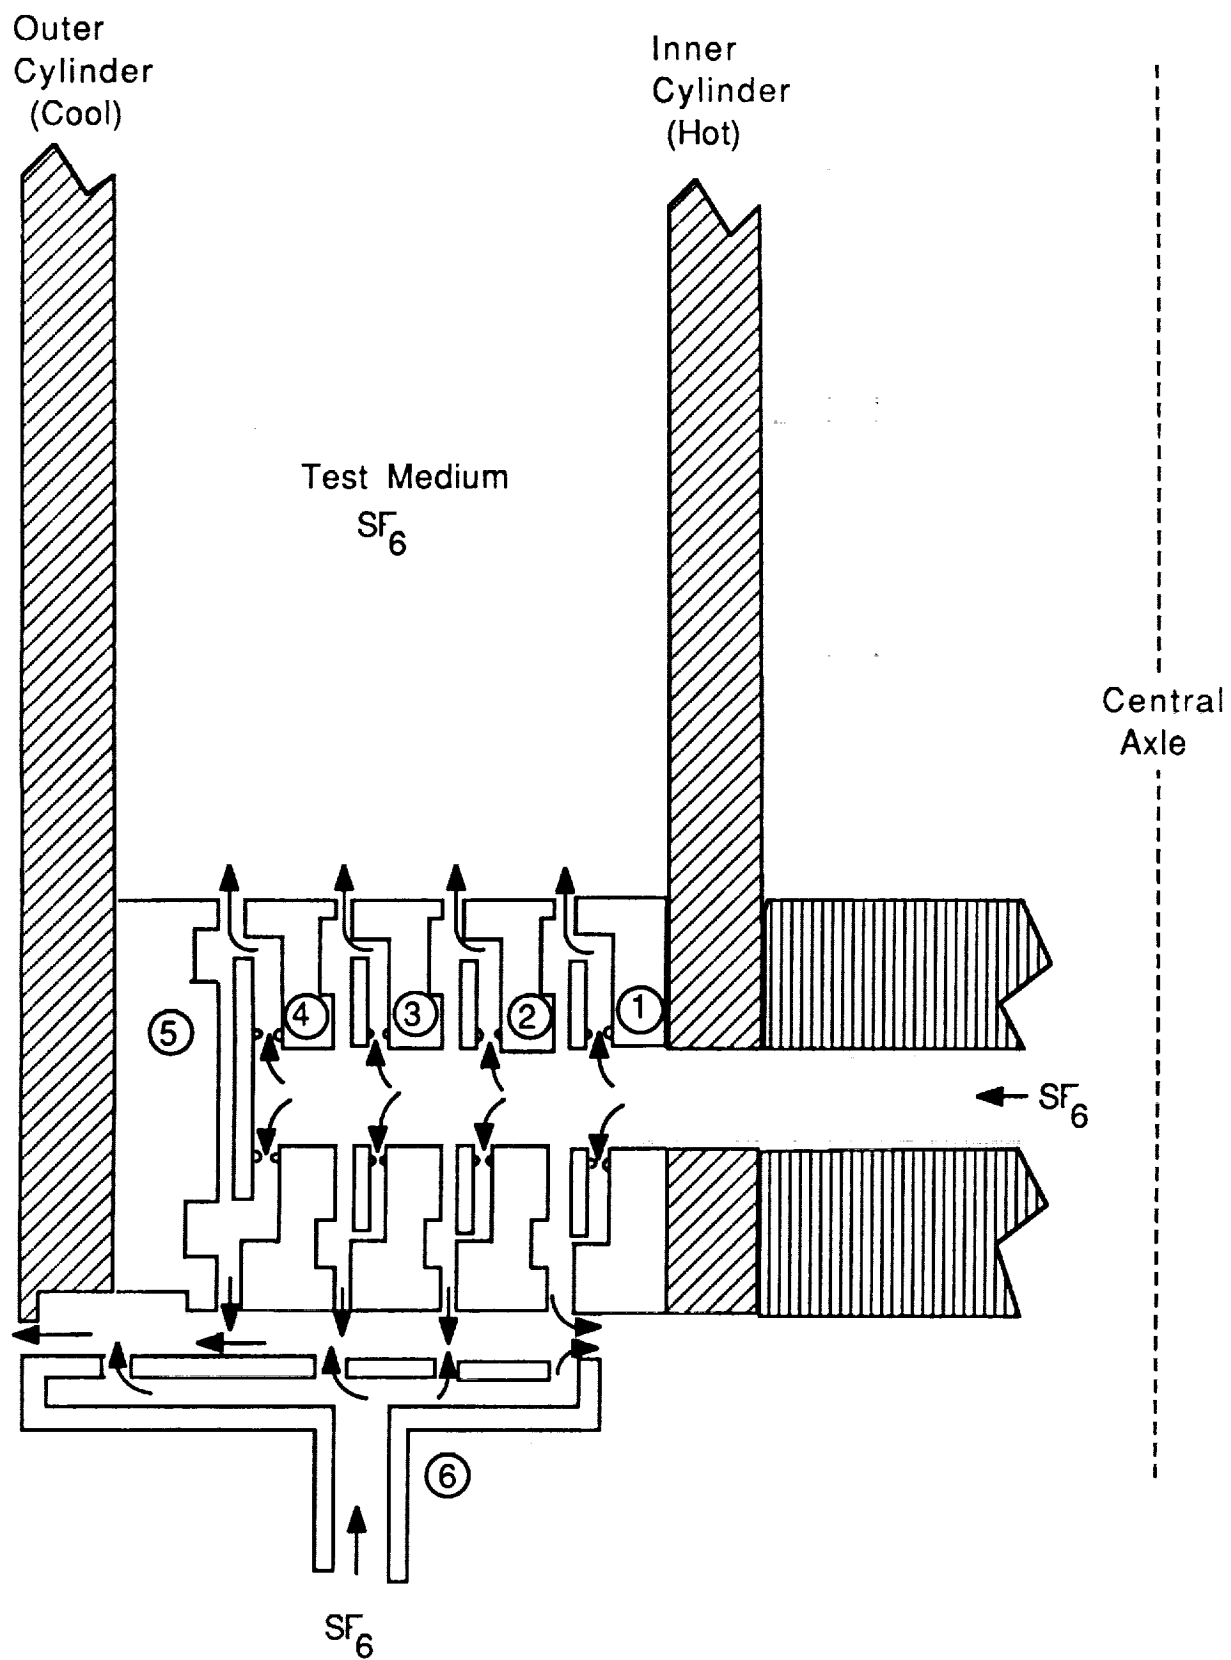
Design concept for gas lubricated, multi-ring bearing for outer cylinder.
